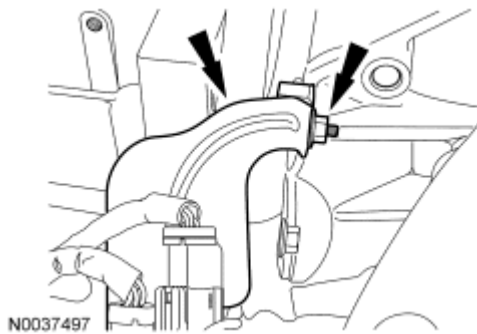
Locating Engine Wiring Harness Bracket And Nut
